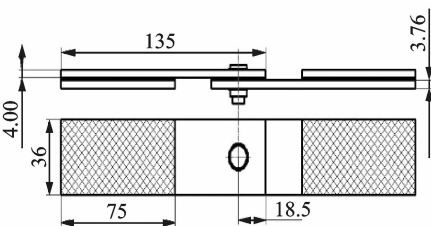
Dimensions in millimeter of the single-lap composite-composite-aluminum bolted joint without shim aluminum bolted joint with shim
